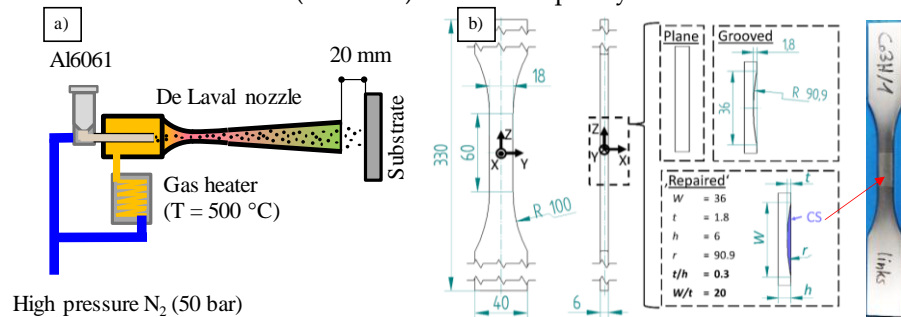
a) Schematic of the CSAM process; b) Design and dimensions for the CSAM test specimen.
